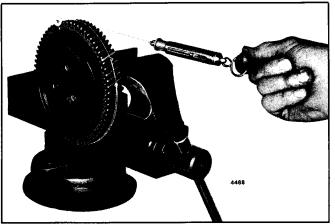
Checking Pre-Load of Idler Gear Bearing
